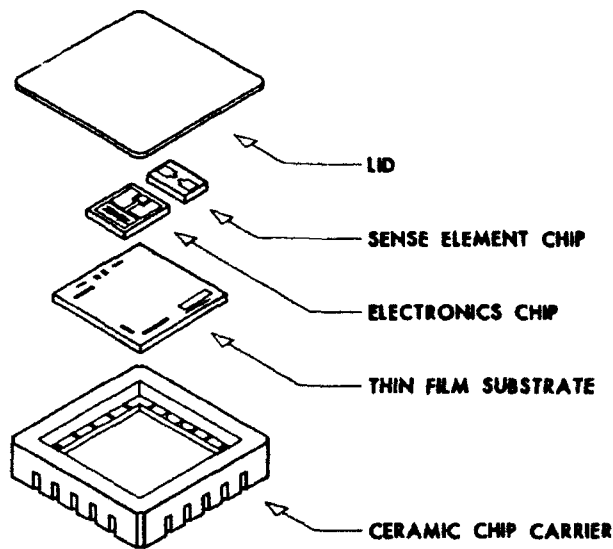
EXPLODED VIEW OF ACCELEROMETER
